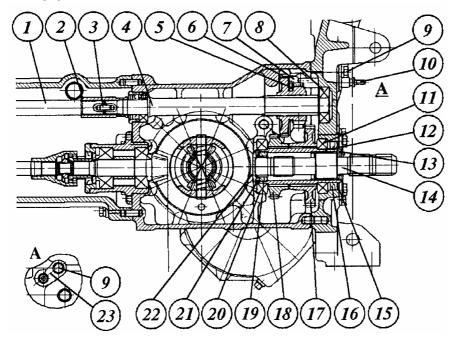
Rear power transmission shaft 1,4- shaft; 2- sleeve; 3pin; 5- fork; 6- toothed wheel; 7- pin; 8,20- ball bearings; 9- retaining pin; 10- shiftable shaft: 11ball bearing; 12- shaft; 13- securing ring; 14-PTS end; 15- housing; 16- sealing; 17- toothed wheel 540 rpm; 18toothed wheel 1000 rpm; 19- o-ring; 21- pin; 22stopper; 23- retaining plate
